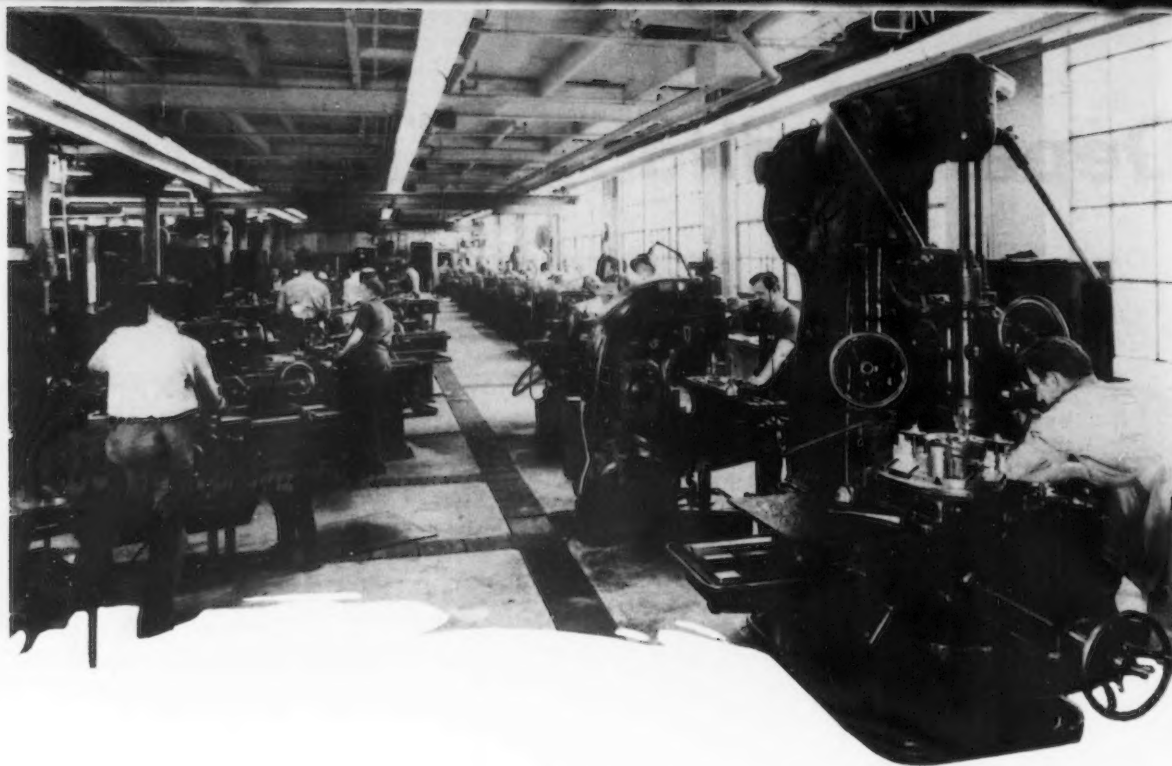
The tool room of the Tool Engineering Dept. is equipped with necessary machine tools and other metalworking equipment required to not only produce but maintain the tools used in the three divisions of the company.
